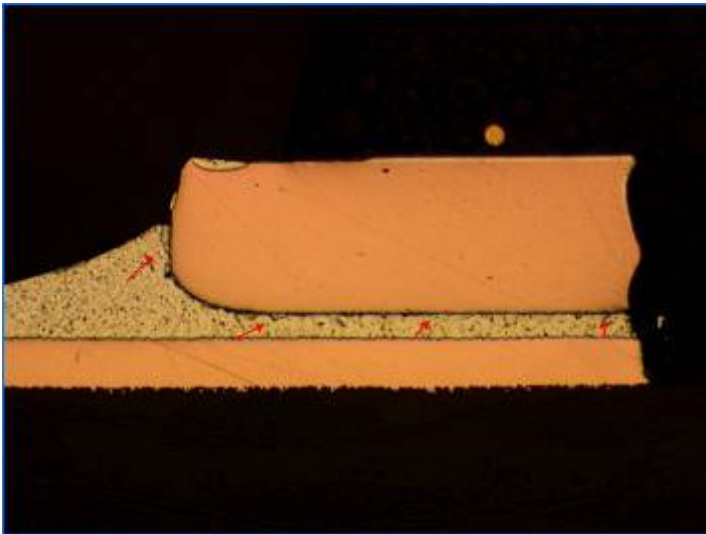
cross section, SN79, U28, left lead solder crack, 100x
